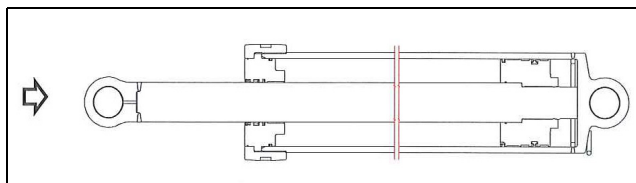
Rod Assembly Installation (Main Boom Lift Cylinder)
